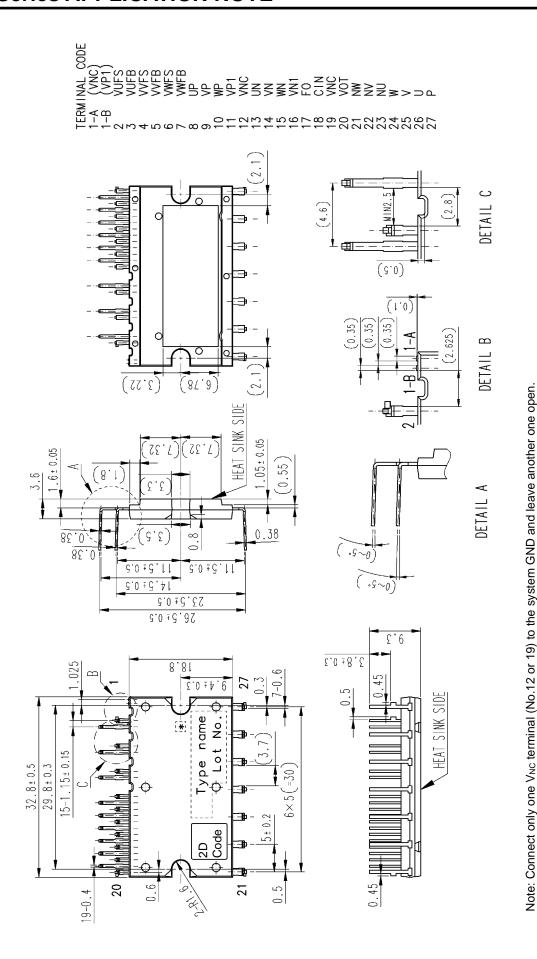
Package outline drawing for control signal zigzag type with short terminal length (Dimension in mm)
